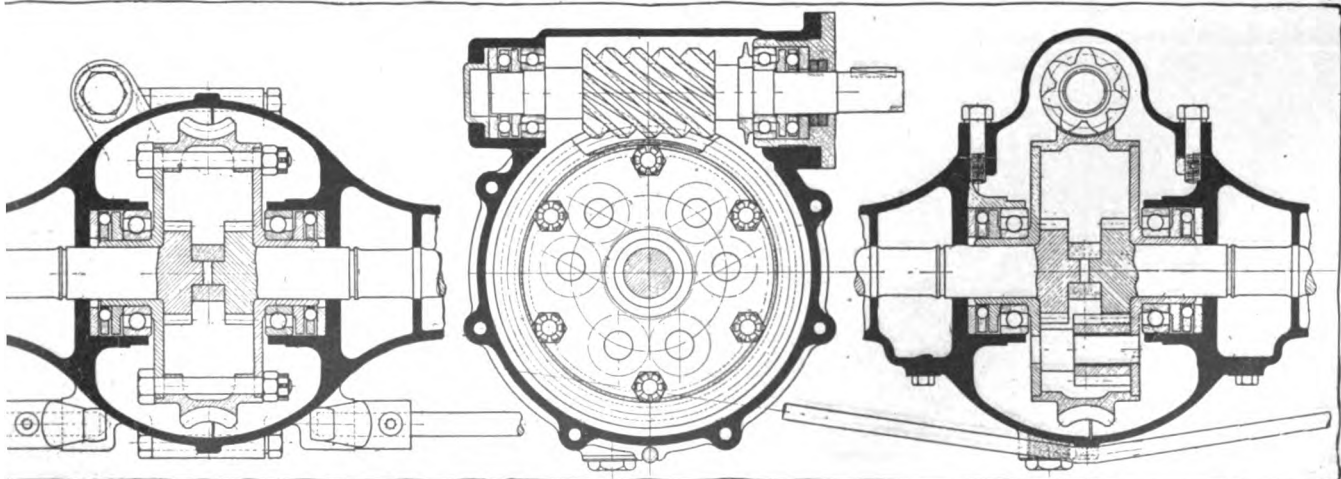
Belsize worm drive, showing ball-bearing mountings for worm and gear. Left and right views show end and center shows side view
